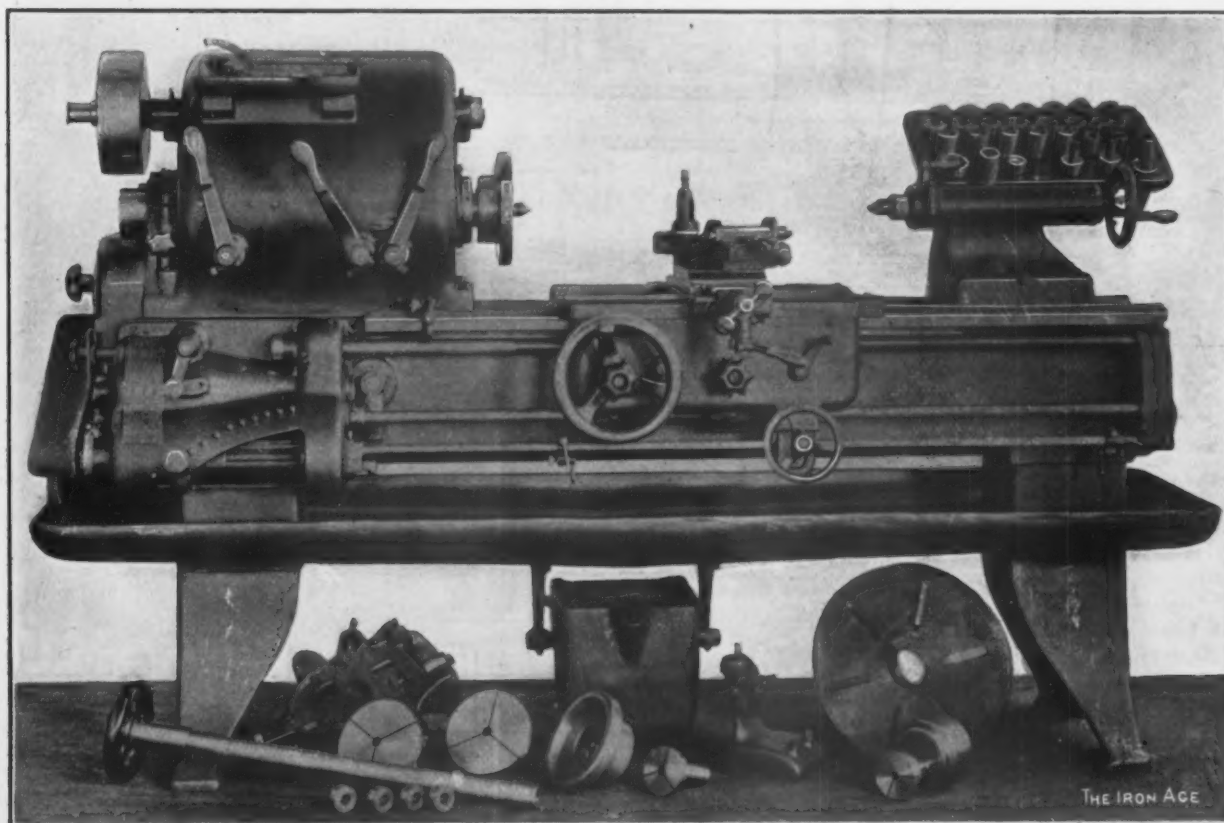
The Geared Head Pattern of the New 16-In. Engine Lathe Built by the Pratt & Whitney Company, Hartford, Conn.
